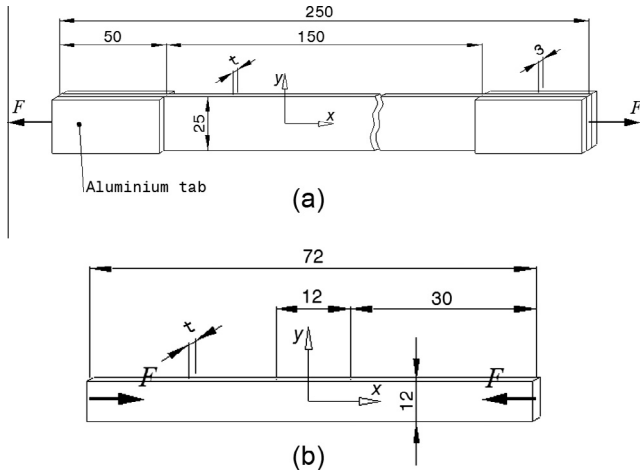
Geometry of (a) tensile and in-plane shear and (b) compression specimens. Dimensions are given in mm.
